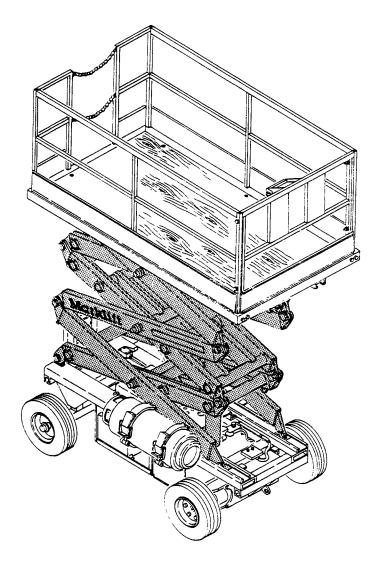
INNER ARM SUPPORT ASSEMBLY
